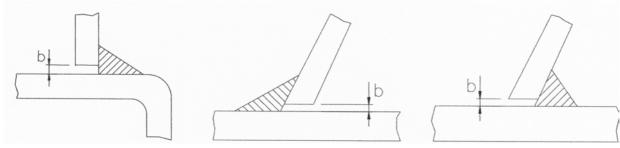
Weld preparation and fit-up Butt welds in square or rectangular hollow section brace to chord joints
